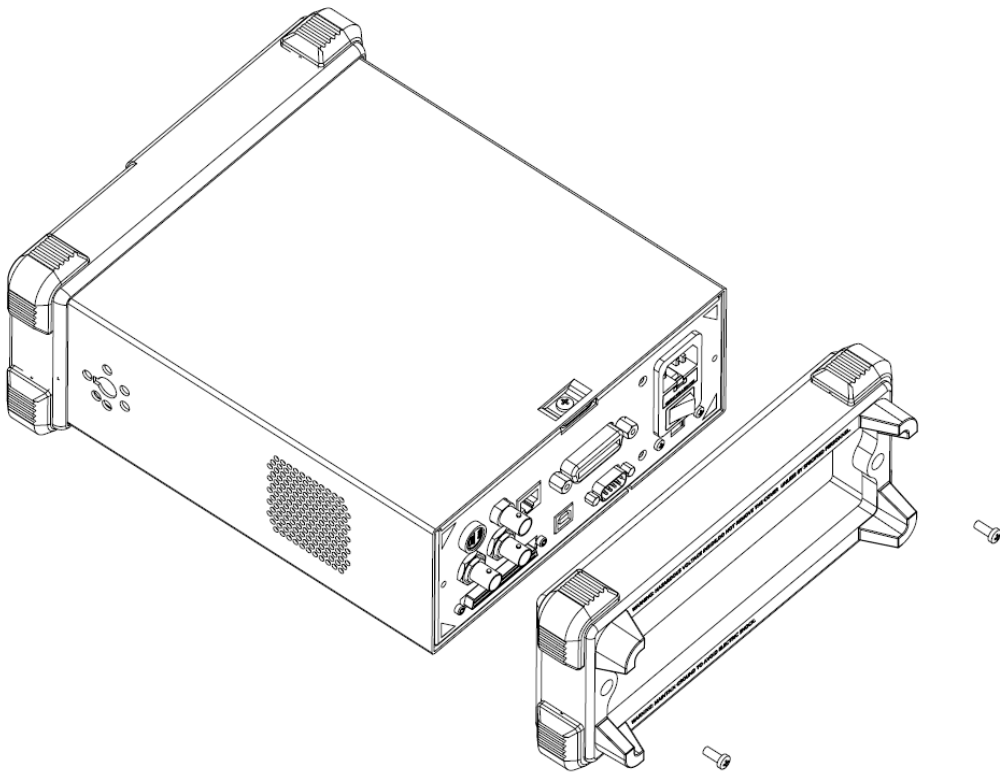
The Schematic of Disassembling and Assembling Rear Panel
